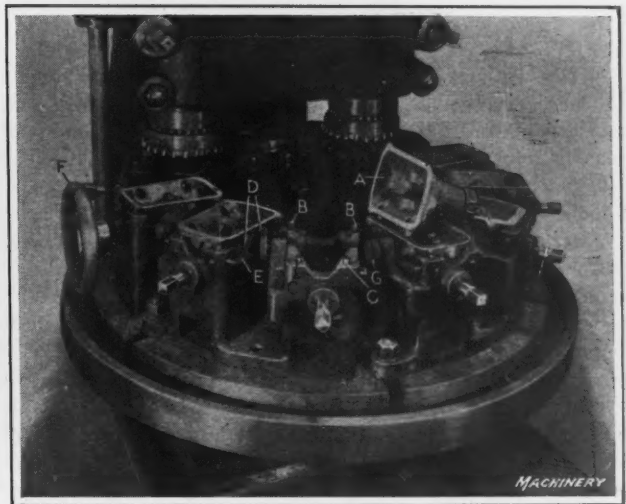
Milling Automobile Gear-case Covers on Newton Continuous Rotary Miller
